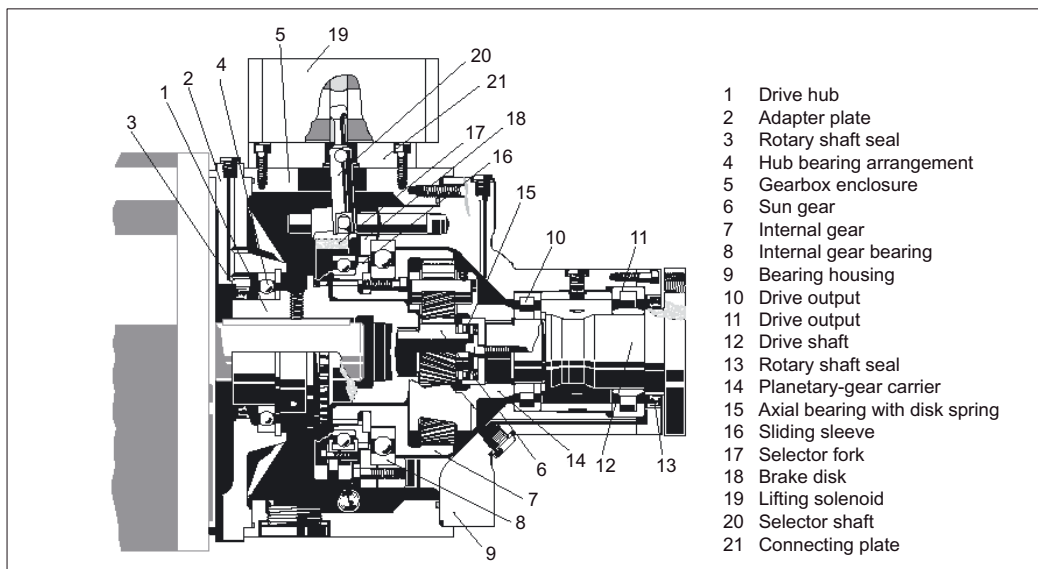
Gearbox design for 1PH7, SH 100 to 160
